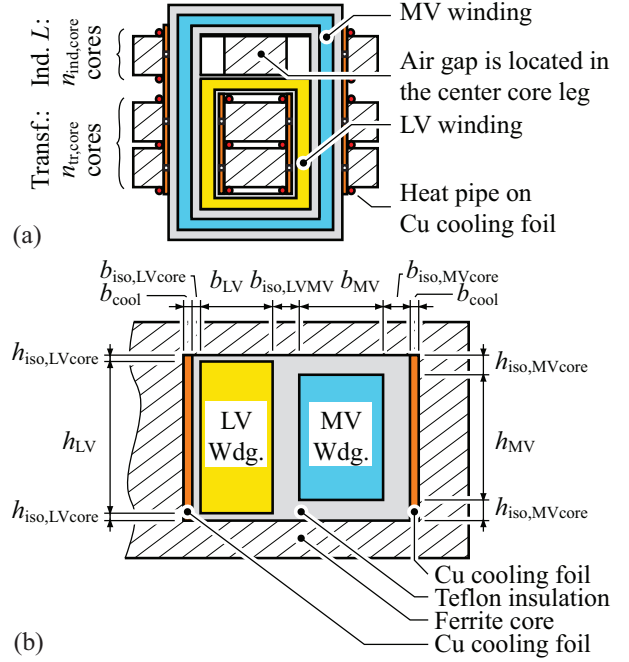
Setup of the HF transformer and inductor; (a) top view; (b) cross sectional view of the winding window.
